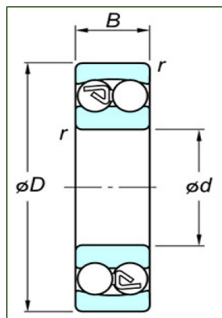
Cross-sectional view of the self-aligning ball bearing.
